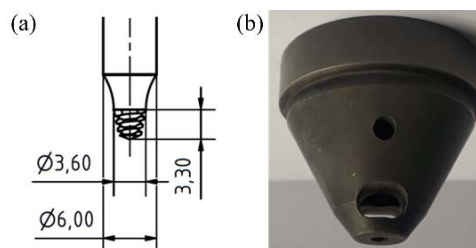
Stationary shoulder FSW tool with (a) probe and (b) shoulder
